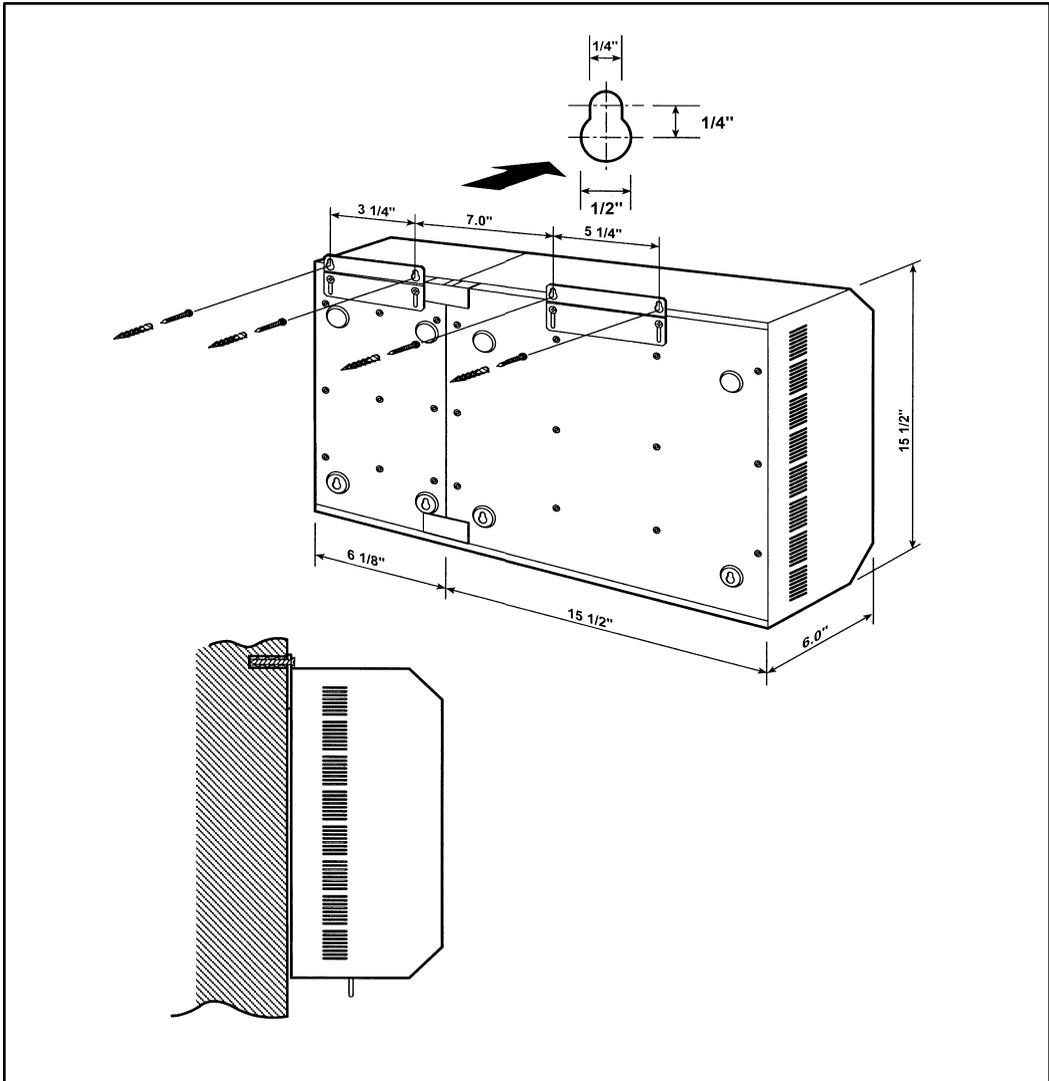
Triad2* KSU Mounting Holes and Installation Layout
